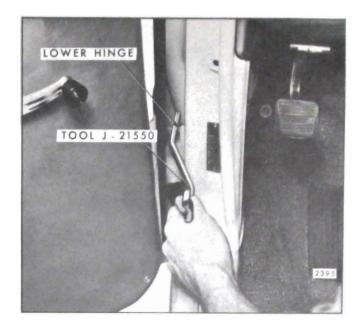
Front Door Hinge Attachment - "F" Style
